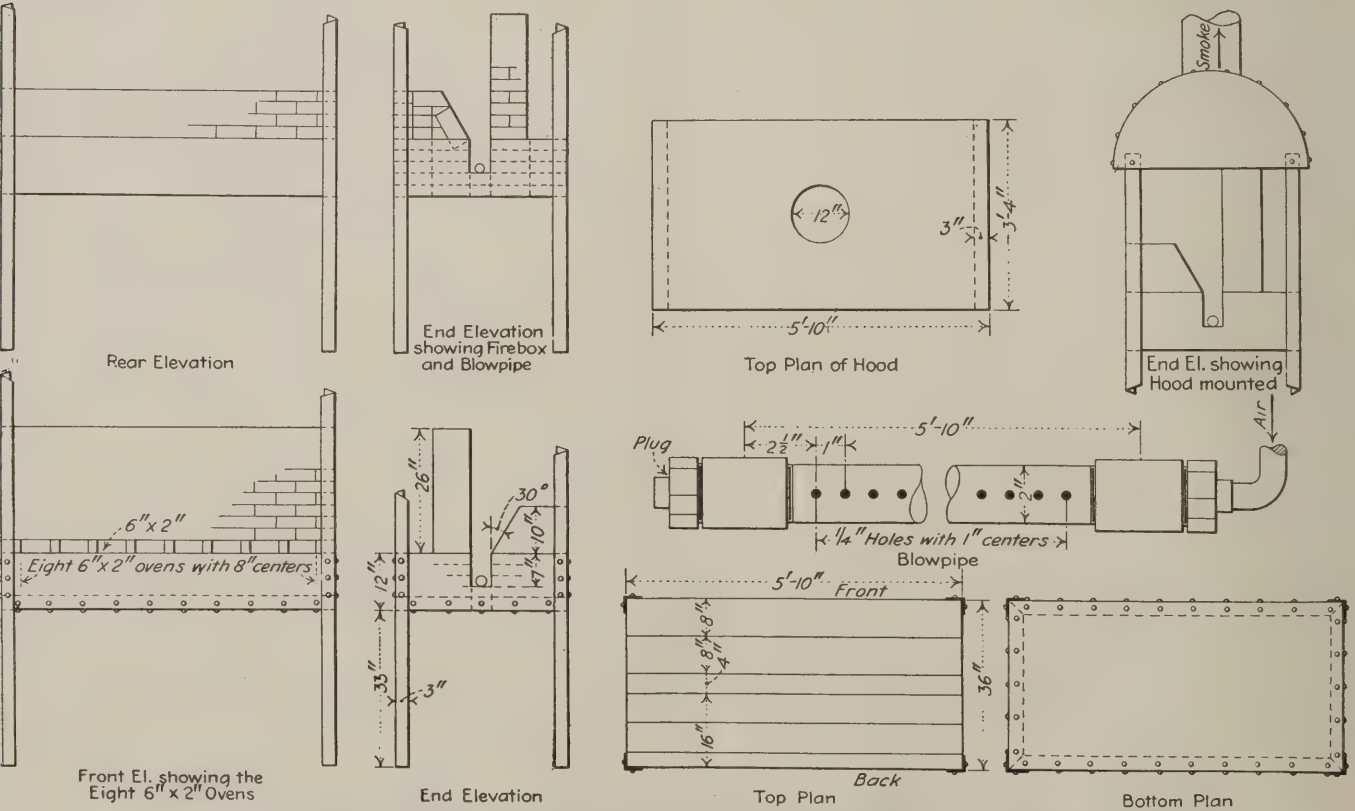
HEATING FURNACE FOR FORGING AND TEMPERING CUTTER BITS
